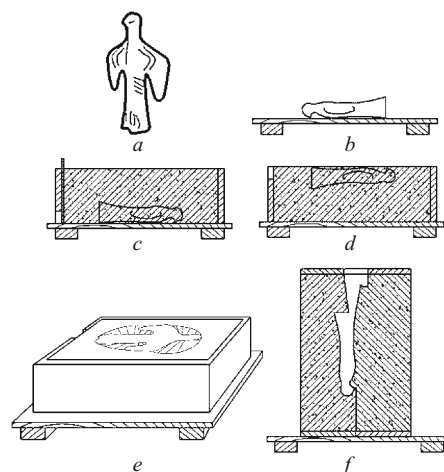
Diagram of modeling with cutting: a) model; b) model placed on a submodel plate; c) bottom half-mold; d) inverted bottom half-mold without cutting; e) bottom half-mold with designed shaped parting surface; f) assembled mold.
